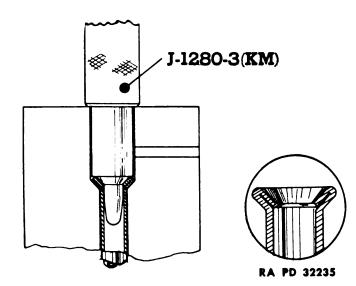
Final Flare-forming Operation, Using Special Flaring Tool KM-J-1280 (41-T-3076-35)
